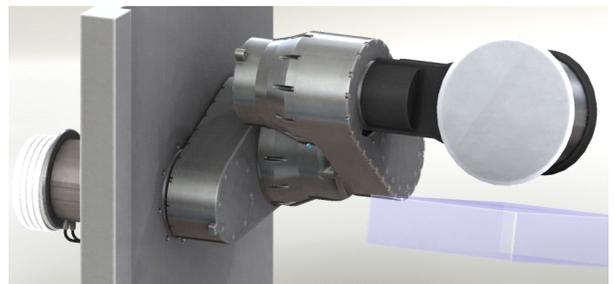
Purion SCARA scan mechanism, showing two in-vacuum link and the universal electrostatic chuck mounted on an arm housing a tilt motor
